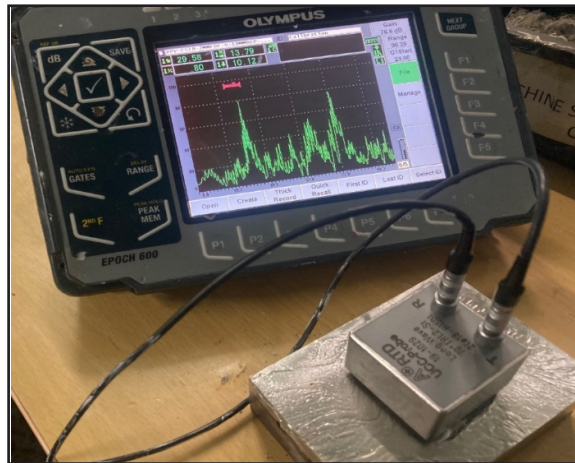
Focused T-R probe for inspection of clad-parent metal interface from cladding surface
